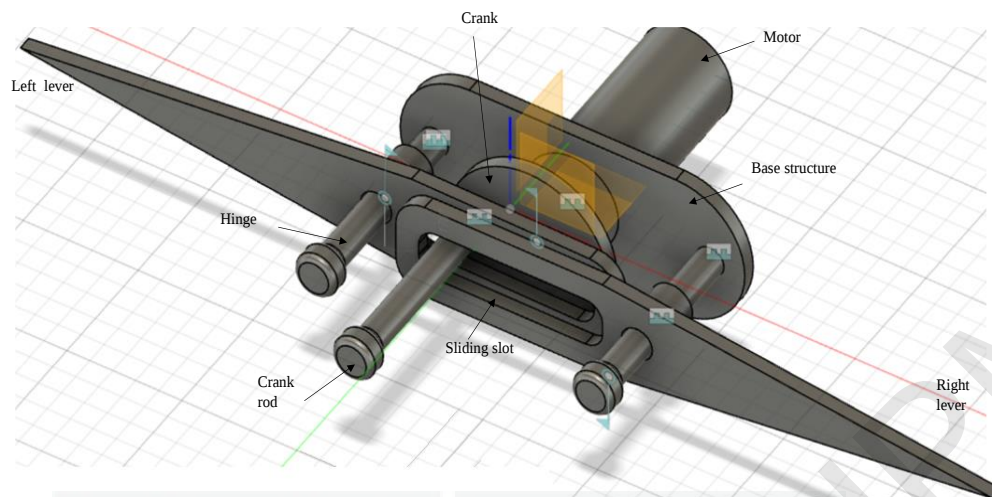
CAD Model of SC-SDL Design -III, a Motor Driven Single Crank - Dual Slotted Lever Mechanism for Flapping Actuation
